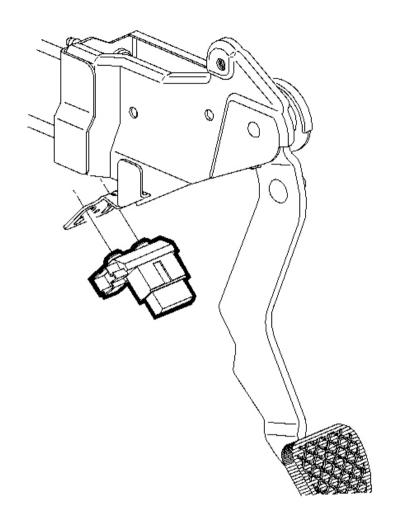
Clutch Pedal Assembly & Bolt Courtesy of GENERAL MOTORS CORP.
